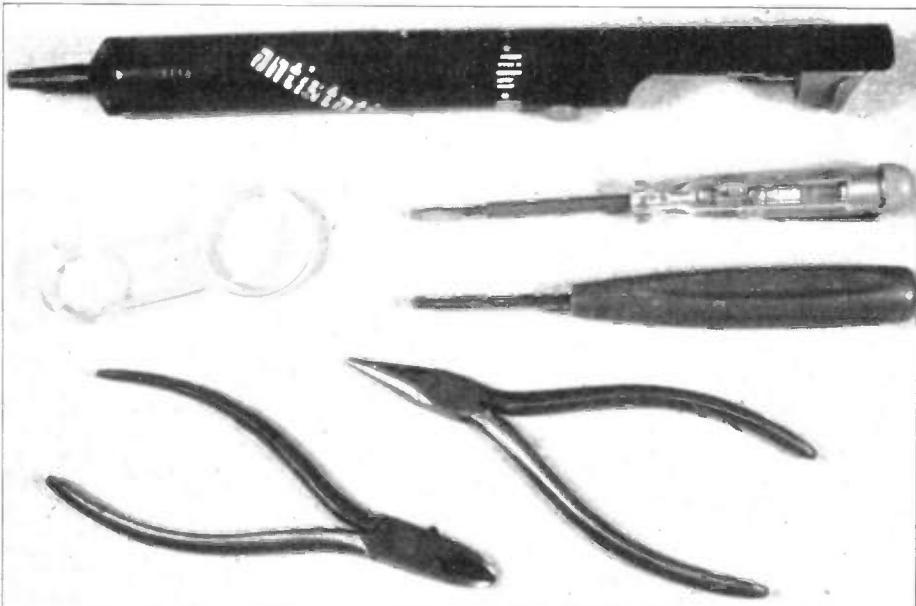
A few of the basic hand tools of electronics, including the 'solder sucker' mentioned in the text. Centre right is a stripboard cutter.
